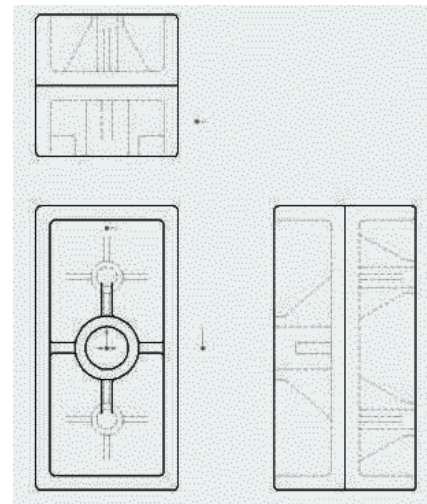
Multi-view drawing of our test geometry, showing the parting line in the top and right views.
